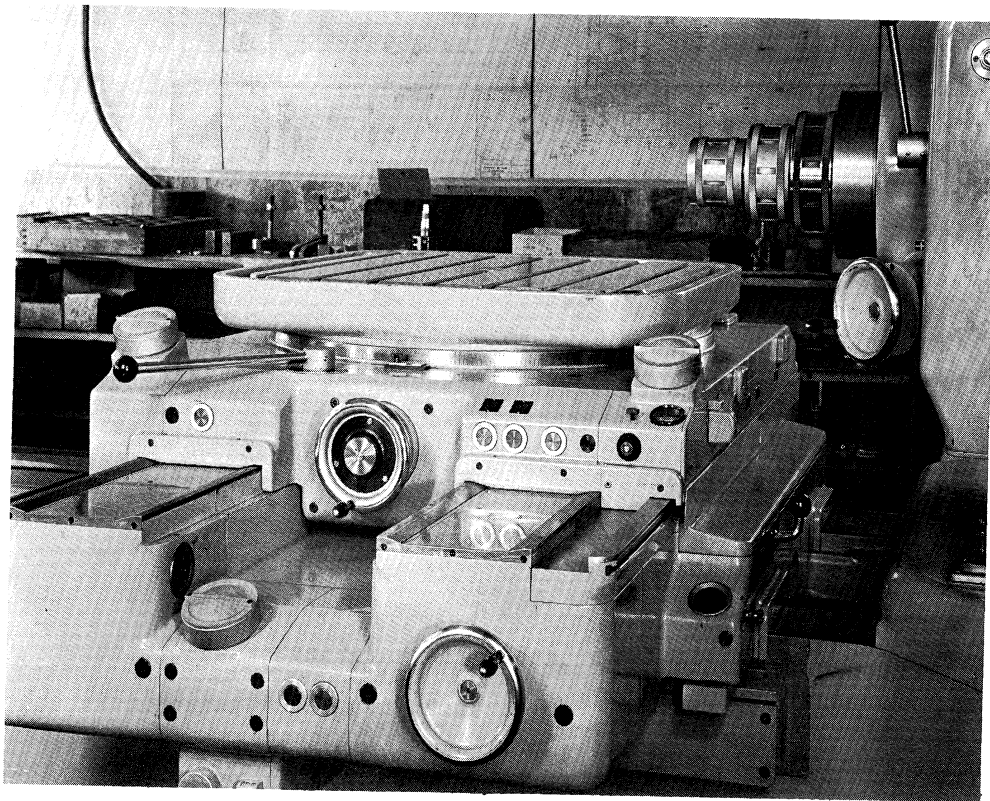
Jig Boring Machine DIXI 3S for Optical or Automatic Positioning. Made by DIXI S. A. Le Locle, Switzerland.
